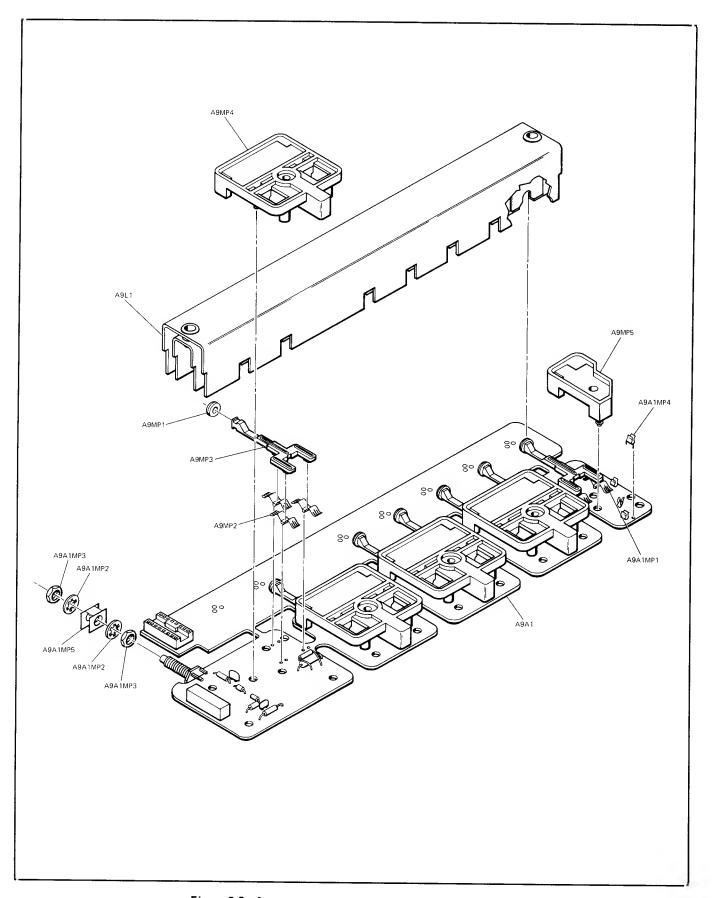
Attenuator Assembly - A9, Parts Identification
